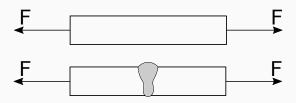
Continuous plate (top) and welded plate (bottom)
